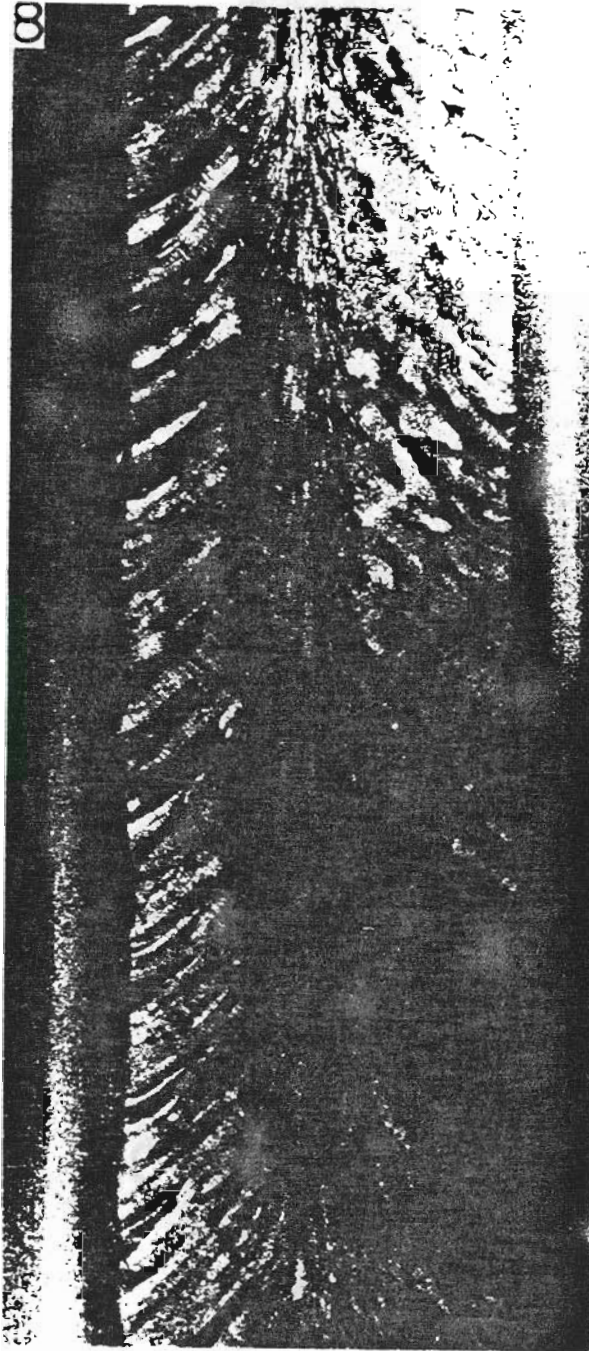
MACROSTRUCTURE OF ELECTROSLAG PLATE WELD.
